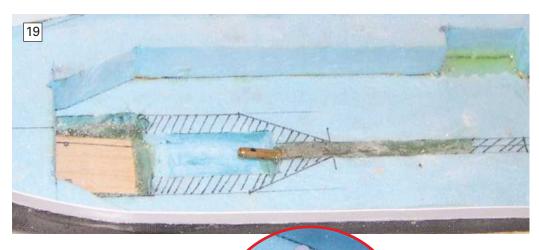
Here we have the plywood motor mount and propshaft tube glued in place.
